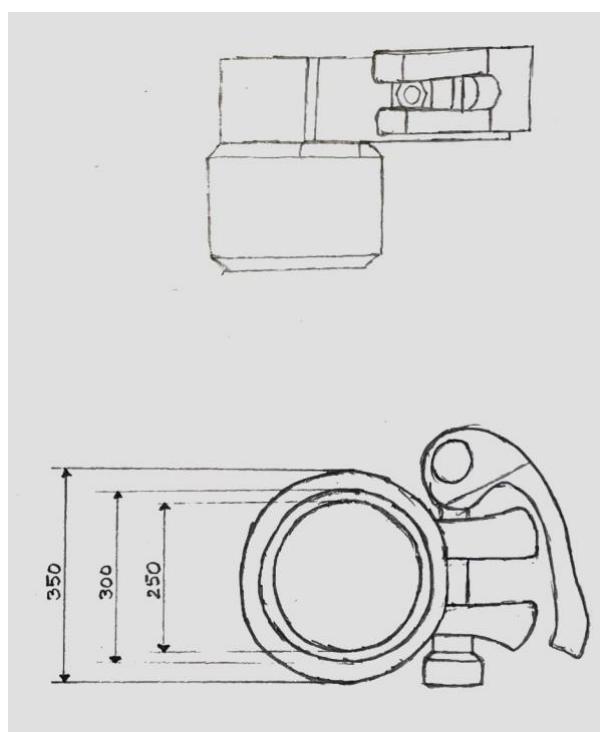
Mechanism to extend and retract Telescopic Rod (Flip Lock)
